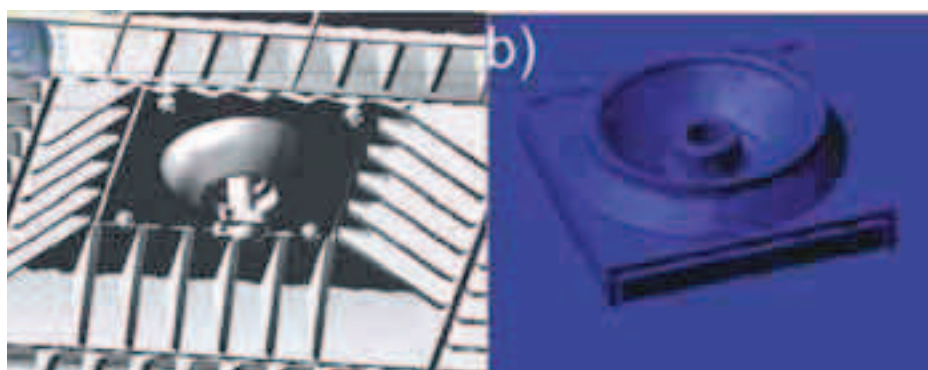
Model of swivel pin used as central junction of floor rotation a) loading floor – down view, b) support – top view
